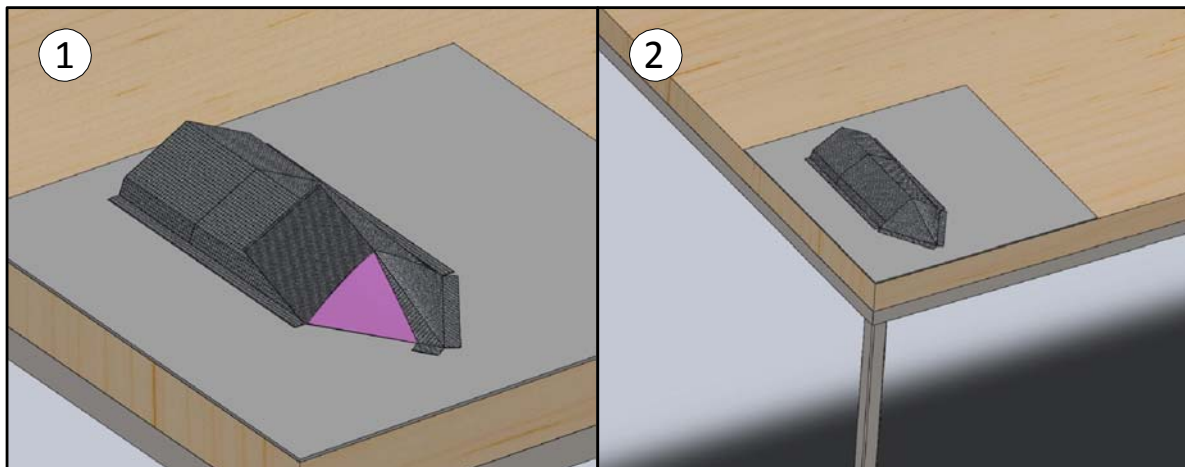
Finish folding the bow- (1) Fold the bow flaps over each other, cutting where necessary to allow the matting to lay flat against the plug.
